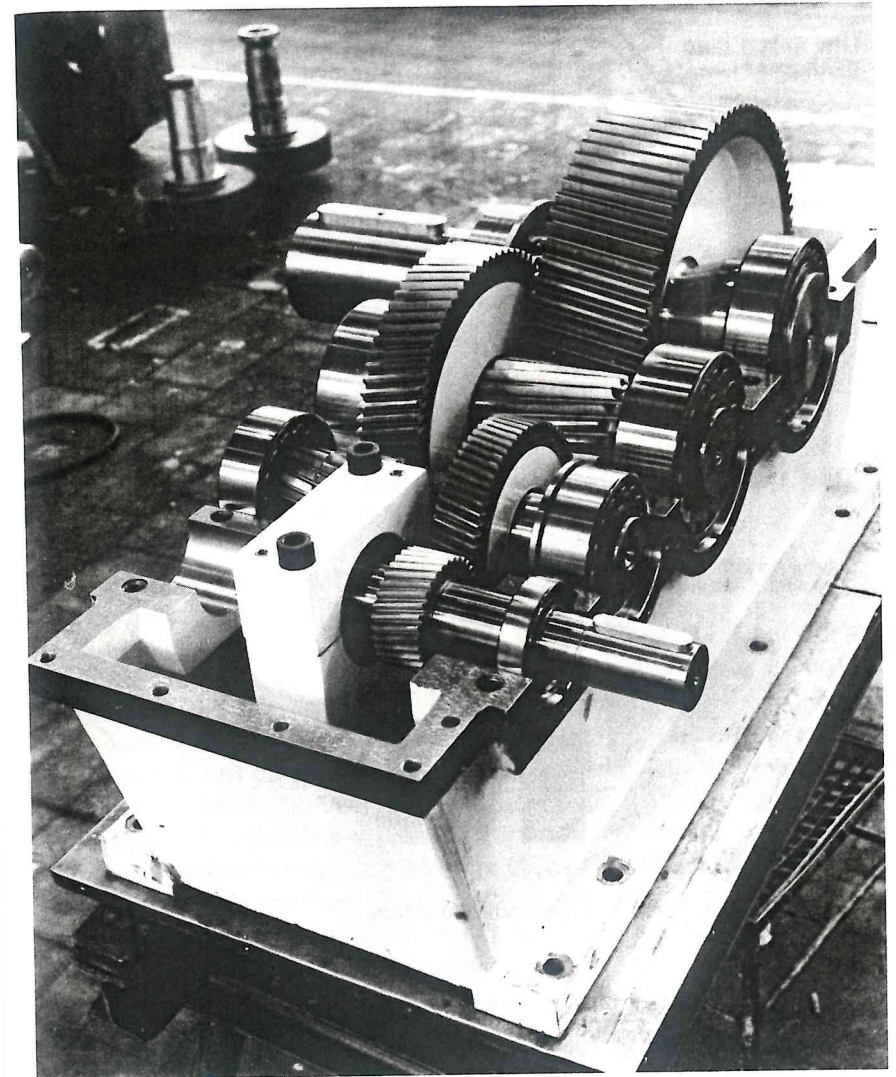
Multi-stage parallel shaft gearbox. (Courtesy of American Lohmann Corporation, Hillside, N.J.)
